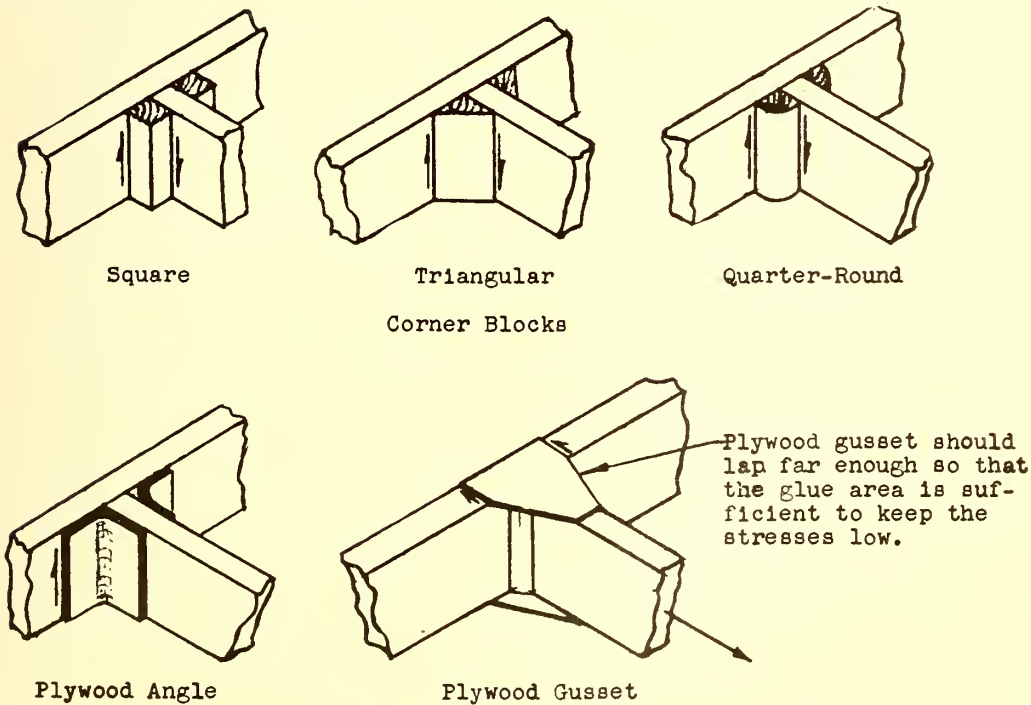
Typical Reinforcement of End Grain Joints.
